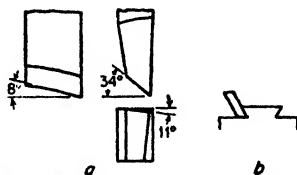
Tool No. 12. (a) Left-hand dovetail end-cutting roughing tool for cast iron; (b) Application of the tool. (*The G. A. Gray Company*)
